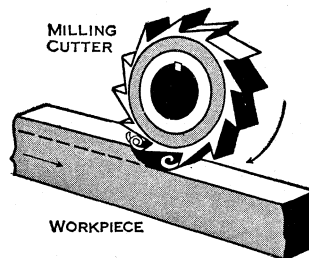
BASIC MACHINE-TOOL OPERATIONS: MILLING
